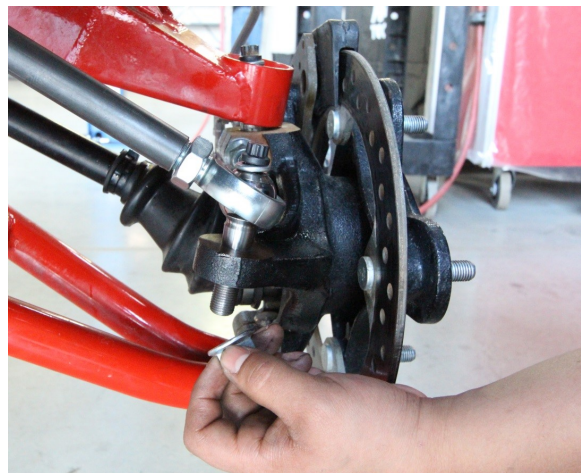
inner rod end attached to clevis, and dust boot tied to clevis groove.
